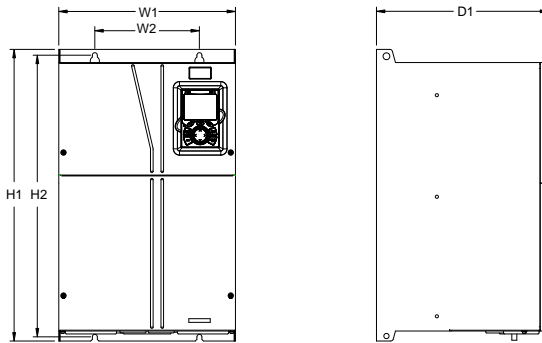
Wall-mounting diagram for 380V 90-110kW models
